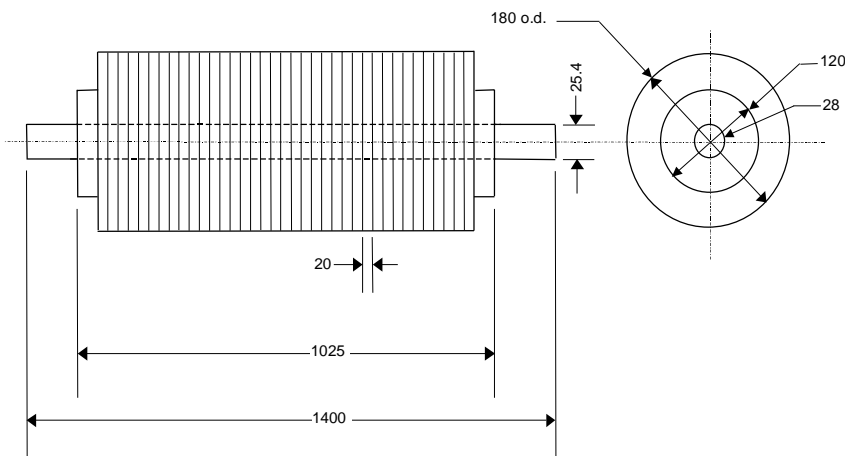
Drawing of rubberized cotton fabric (RCF) washers for making RCF rollers of double roller gins (all dimensions in mm).
